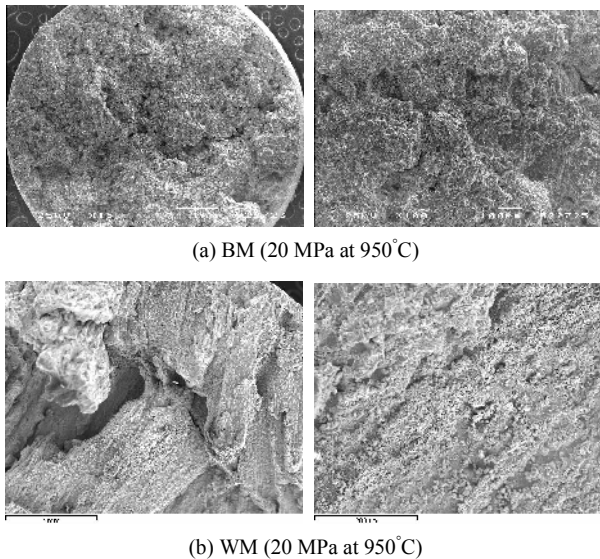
SEM fracture surfaces for the BM and WM tested under 20 MPa at 950°C.
